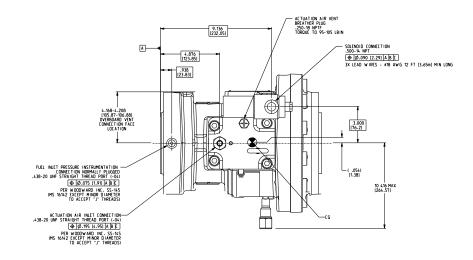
GSOV80 Connector Version Outline Drawing (Side B)
